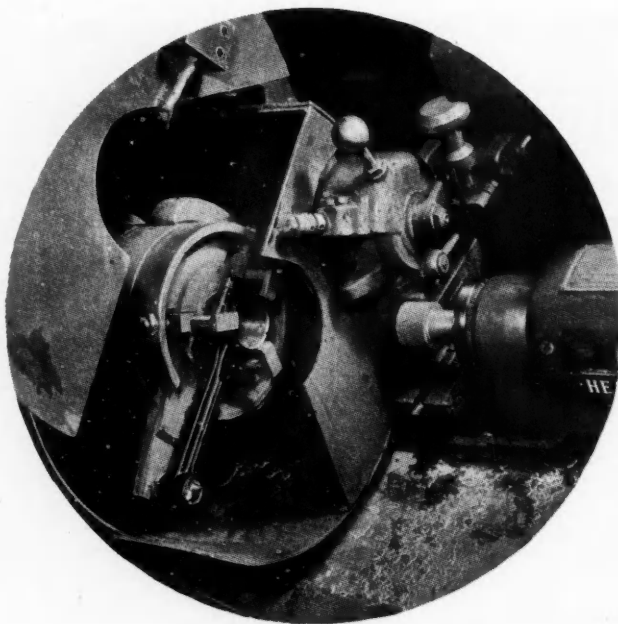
Grinding the connecting rod big end hole on a Heald 72A internal grinding machine equipped with one of the new Red Head attachments.
